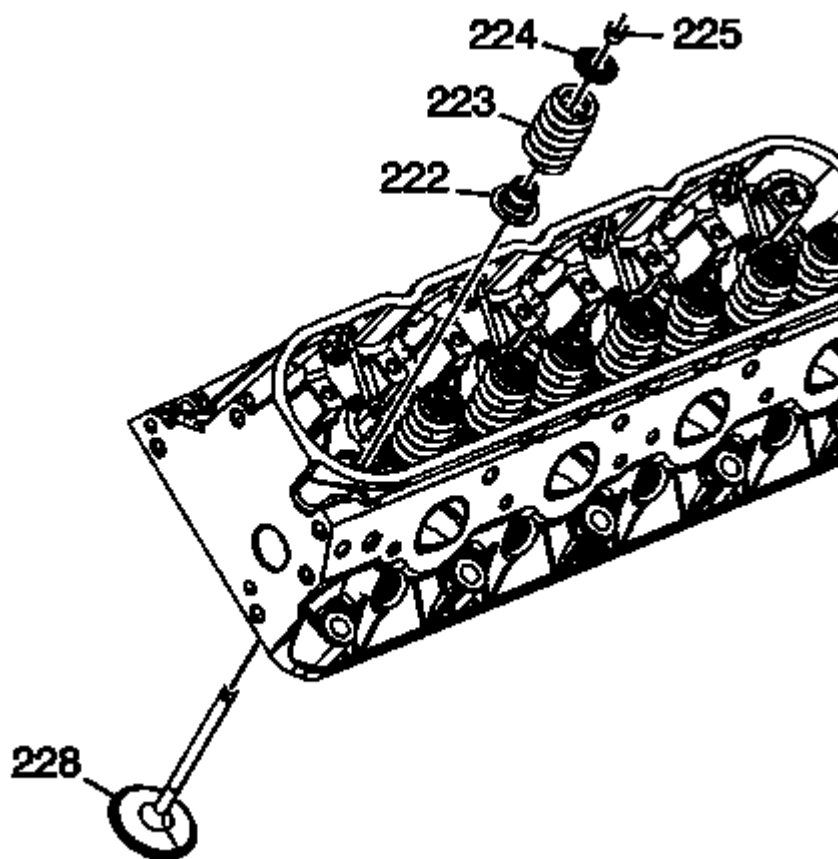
Valve Stem Keys, Valve Spring Cap & Valve Spring
